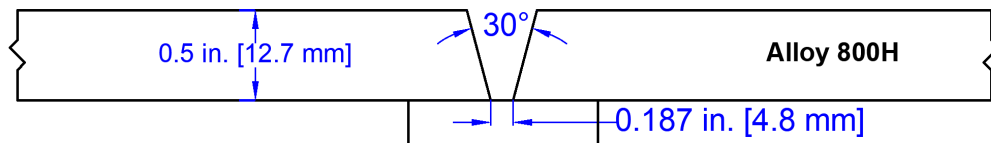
Full penetration butt joint, V-groove geometry with backing plate used for weld qualification analysis.
